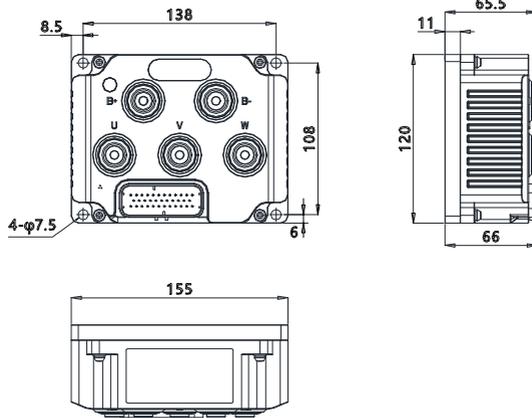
Outline, mounting dimensions of L630-2424-Z
